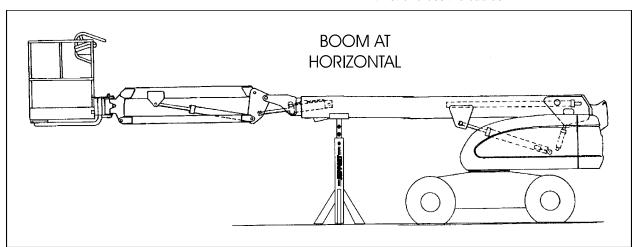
Boom Positioning and Support, Cylinder Repair (S Models)
